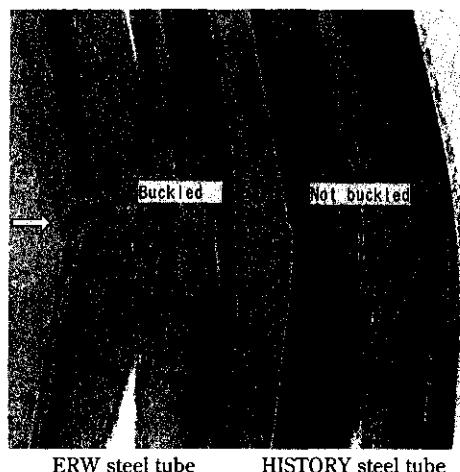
Appearance of bent tubes of ERW and HISTORY steel tube after draw bending without internal plug (bending conditions: R = 150 mm × 20°)
